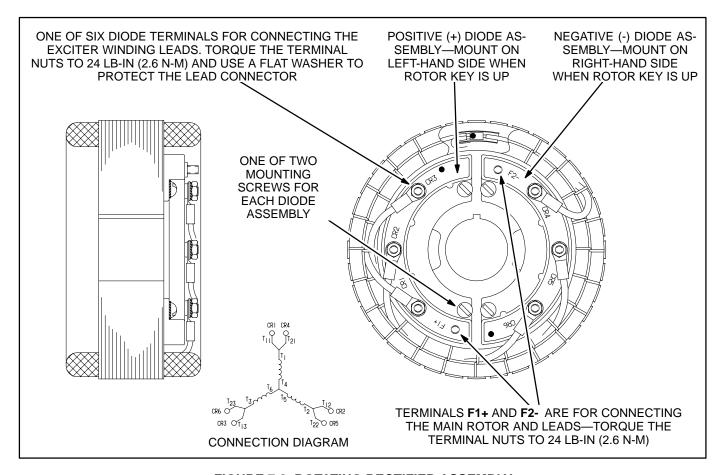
ROTATING RECTIFIER ASSEMBLY
